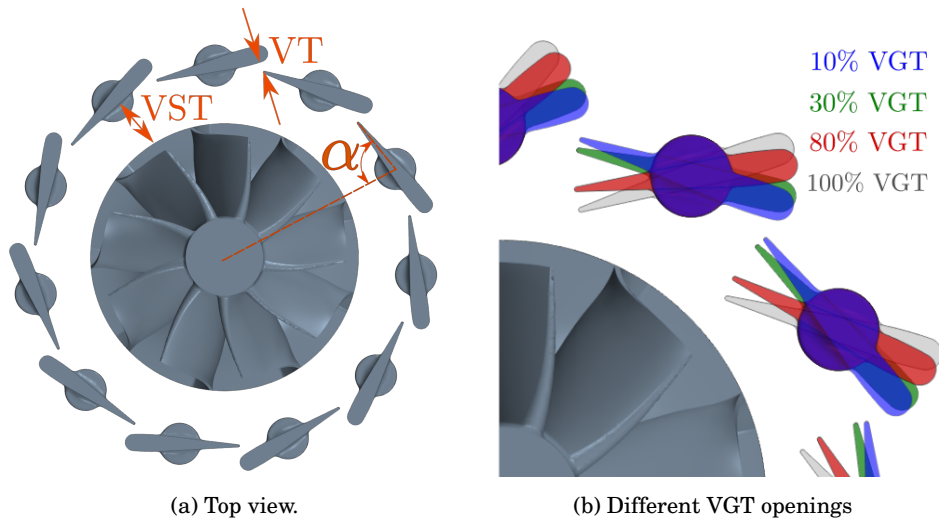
Stator and rotor geometry. VT: Vane throat. VST: Vaneless space throat.
